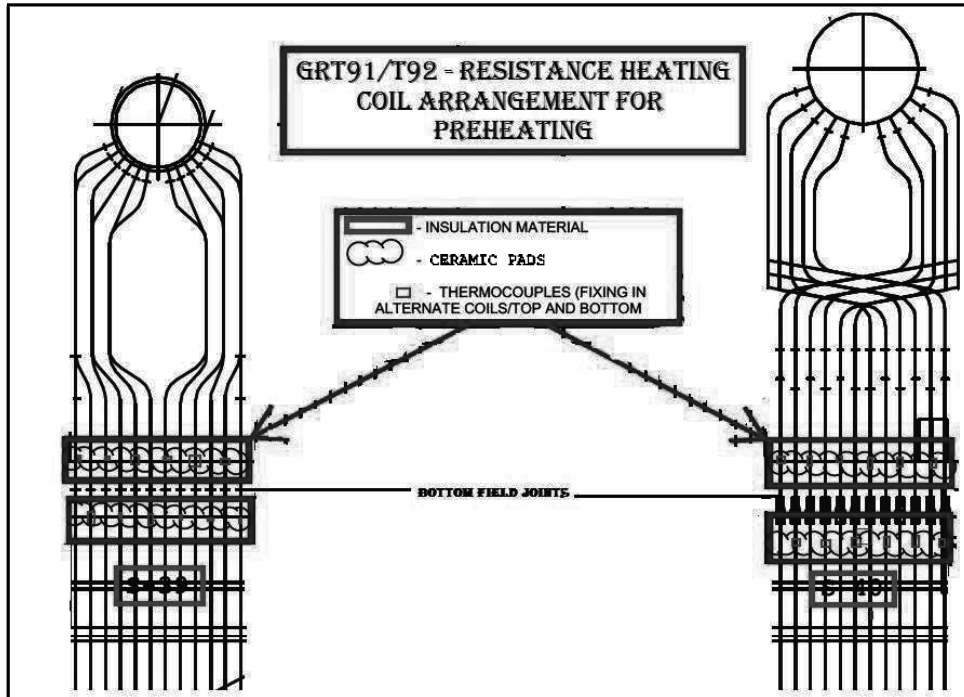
Resistance heating Coil arrangement for Preheating of T91/T92 tube assembly
